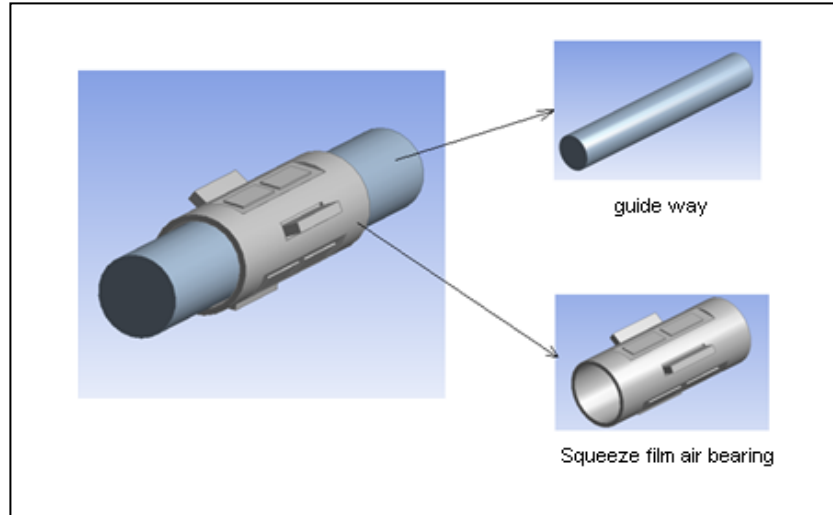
Squeeze air film bearing and its components: a guide way, a bearing and six piezoelectric actuators bonded to the three flat surfaces
